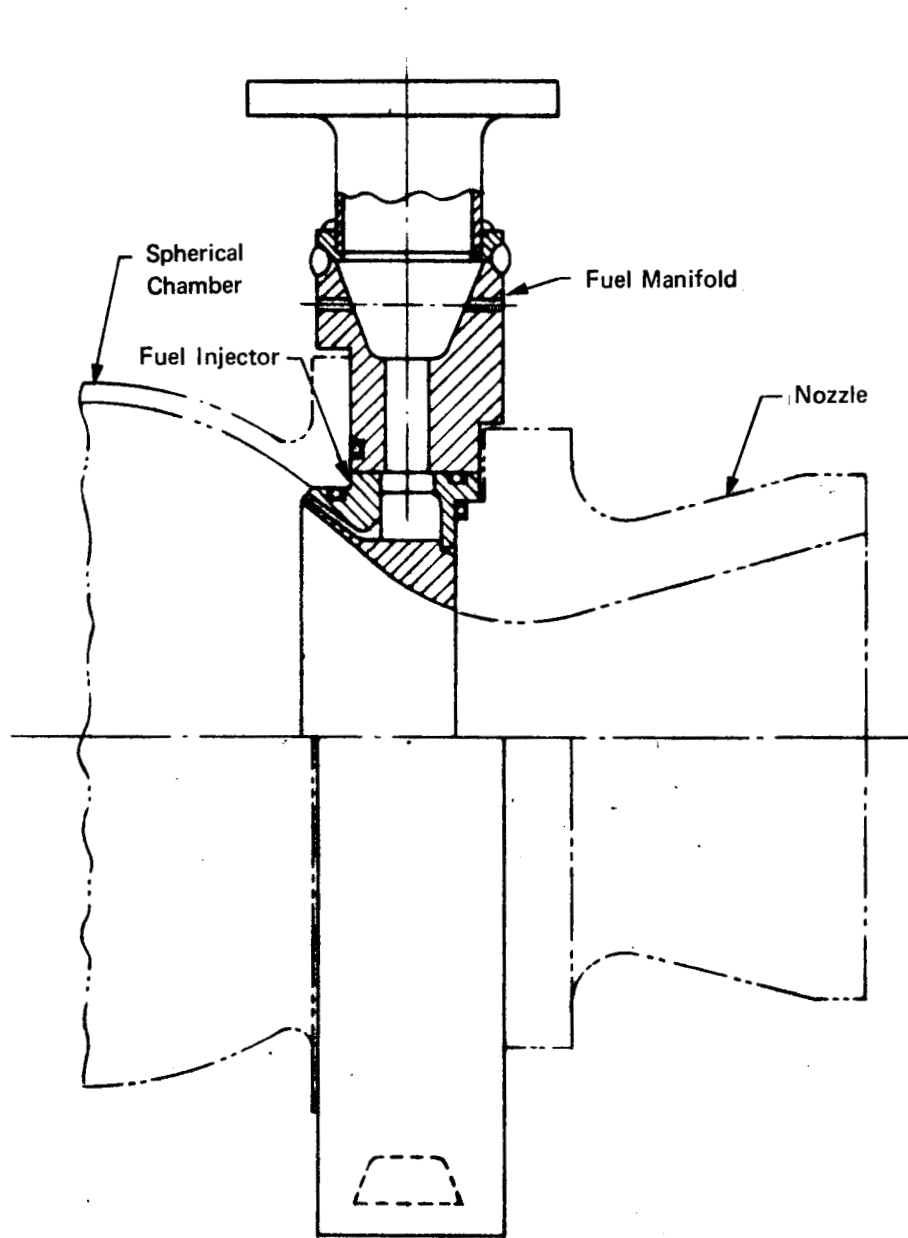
Fuel Injector Assembly and Fuel Manifold Assembly
